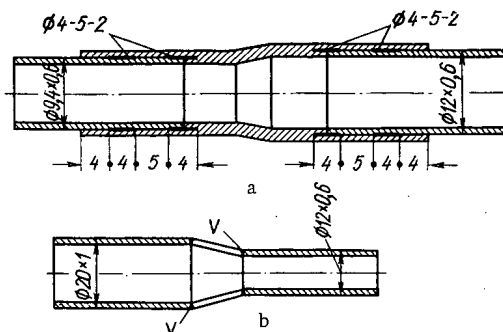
Gapless welds by roller (a) and argon-arc (b) welding.
